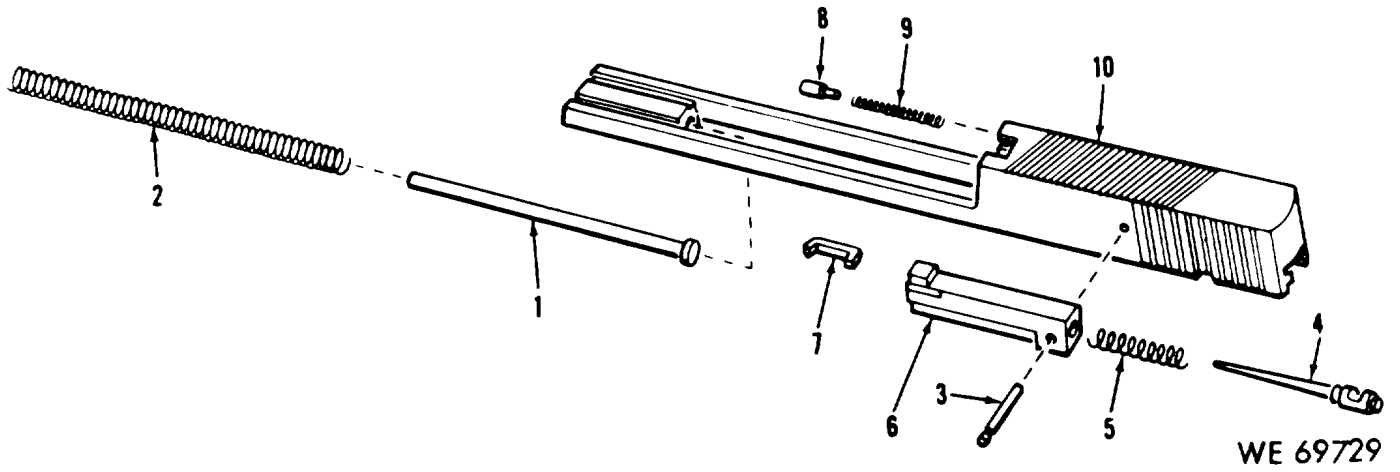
Slide assembly for Model 41 Smith and Wesson cal. .22 automatic pistol-exploded view
